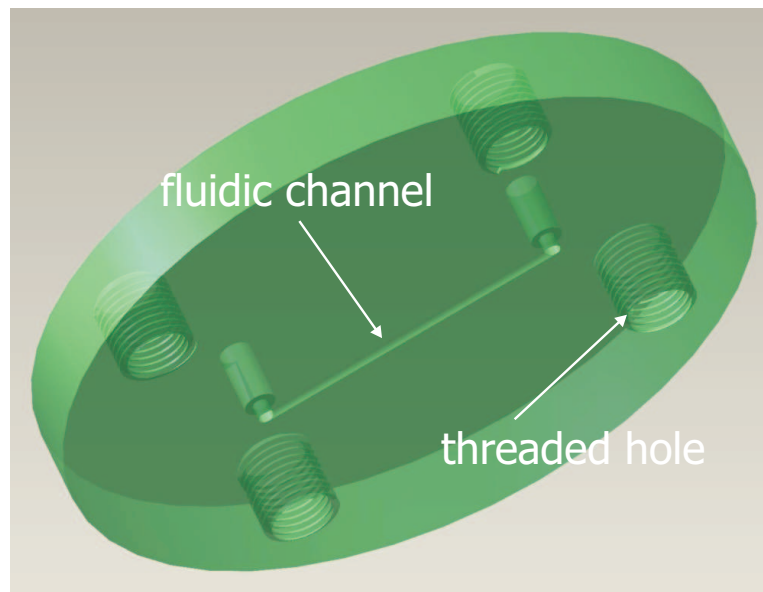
A microchannel was machined into the top layer and allowed the valve membrane to expand. To ensure proper sealing of the channel, its cross-sectional geometry was hemispherical. The threaded holes furthermore allowed easy assembly of the three layers using screws.
